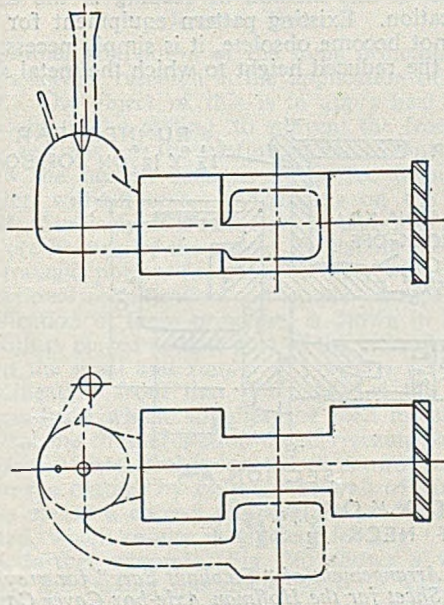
Mould Arrangement incorporating both a Remote Heating Pad and a Chill.
